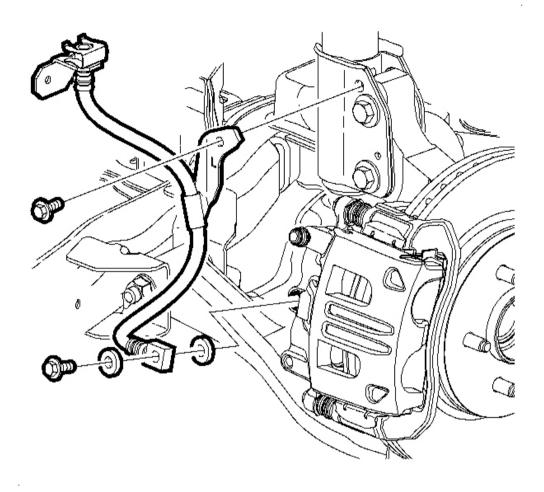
Removing/Installing Front Brake Hose Bracket Retaining Bolt Courtesy of GENERAL MOTORS CORP.
